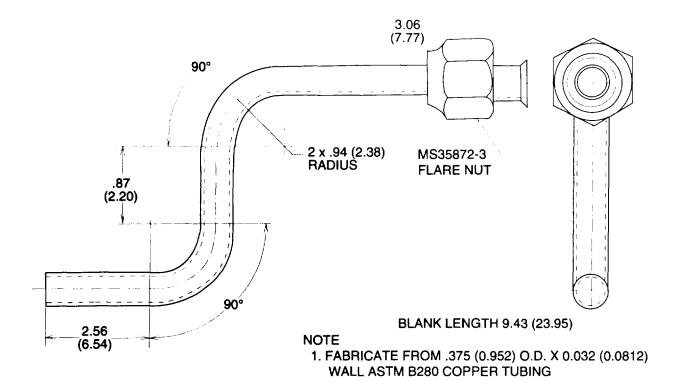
Tube, Hand Valve To Solenoid N.C., Part Number 148K0224-1/T
